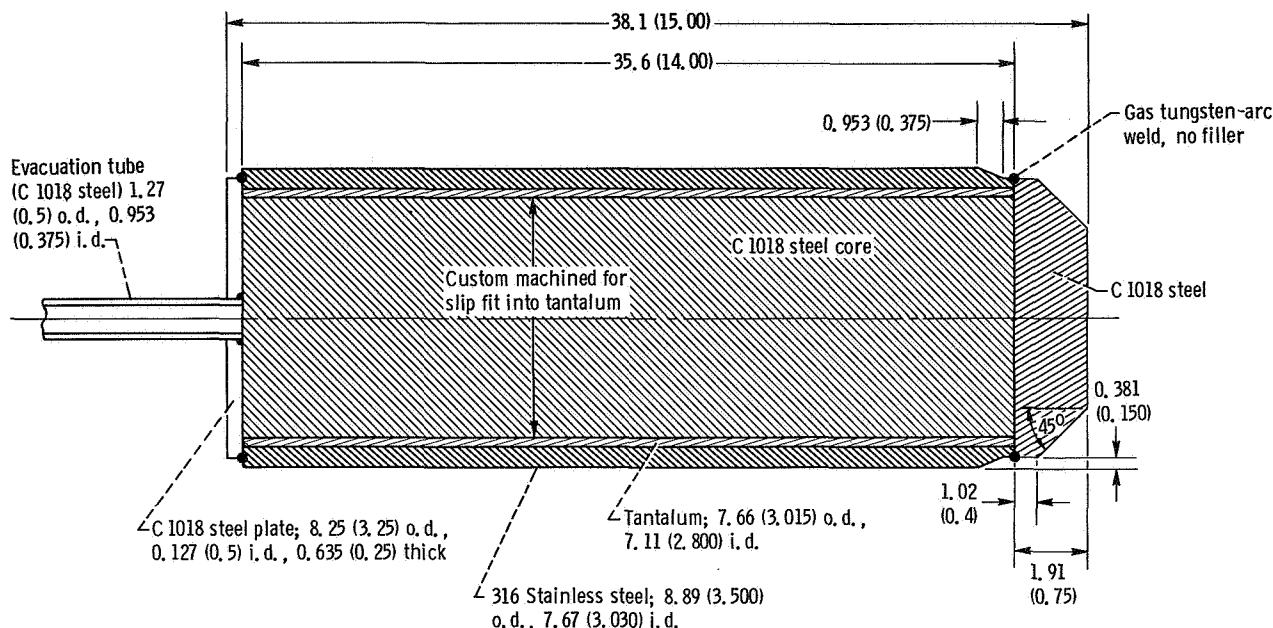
Extrusion billet design for producing tantalum/316 stainless steel tubing using a filled billet method. (All dimensions are in cm (in.).)
